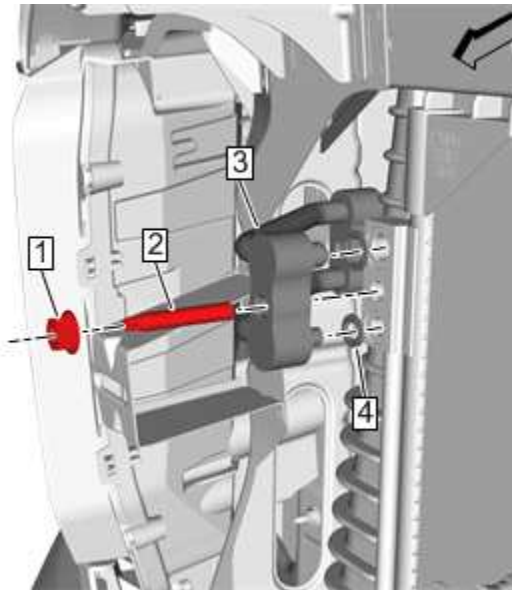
Air Conditioning Evaporative Connector Hose/Tube And Compressor And Condenser Hose Nut
